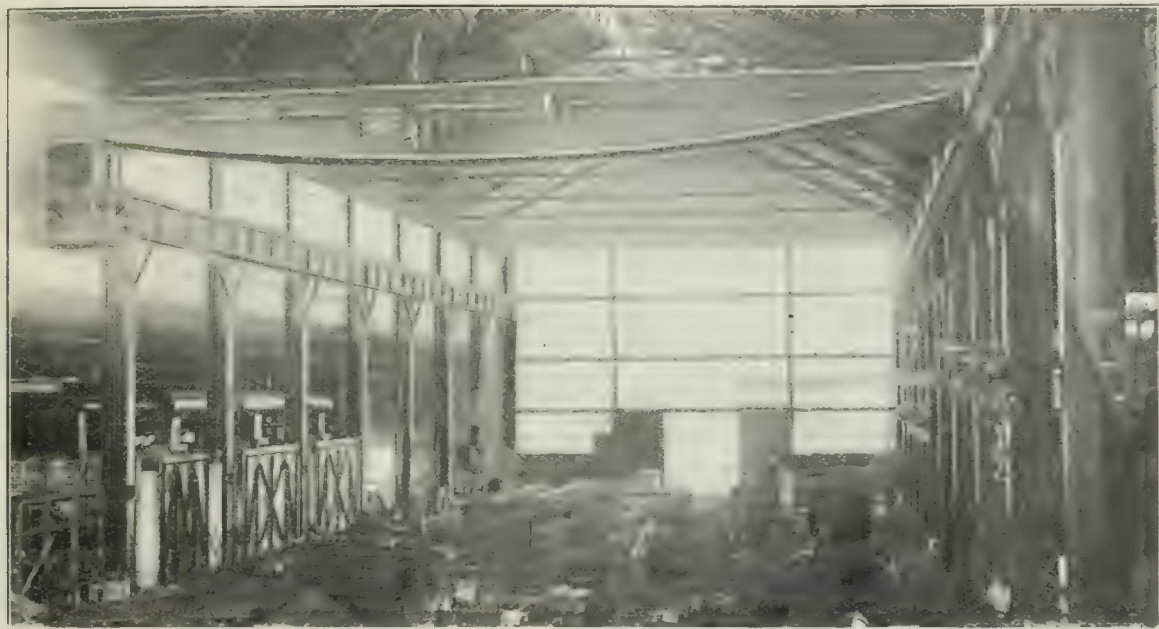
Interior of the Foundry Looking Toward the Cleaning Department
